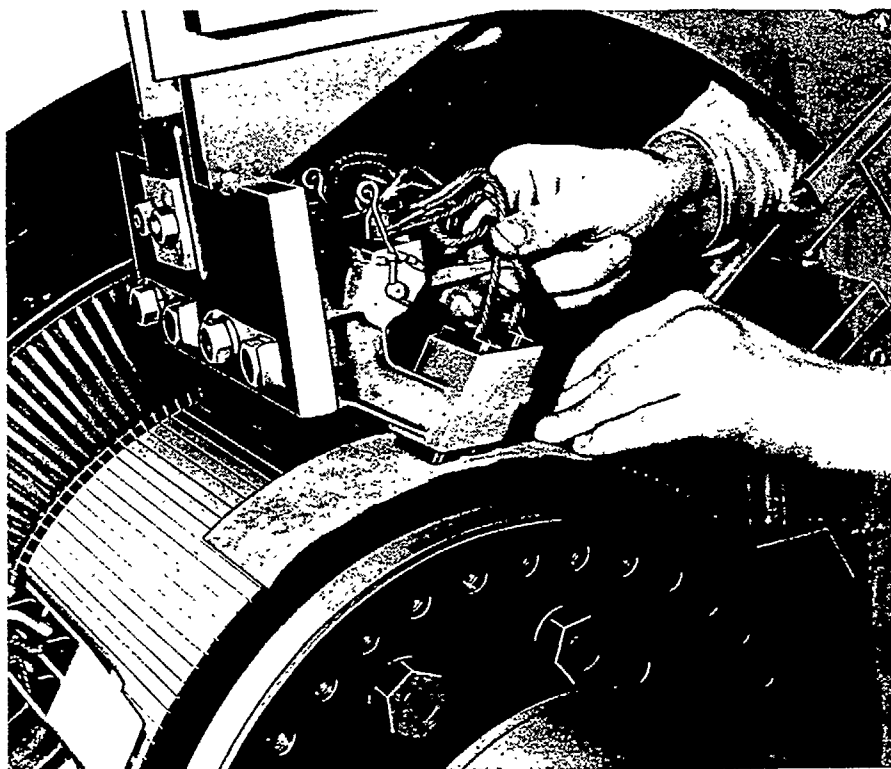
Proper Method of Grinding Carbon Brushes
